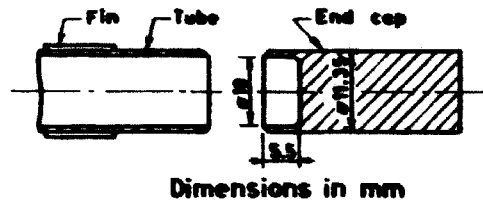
Geometry of components used for end capping multifinned SAP 930 tube by flash welding.
